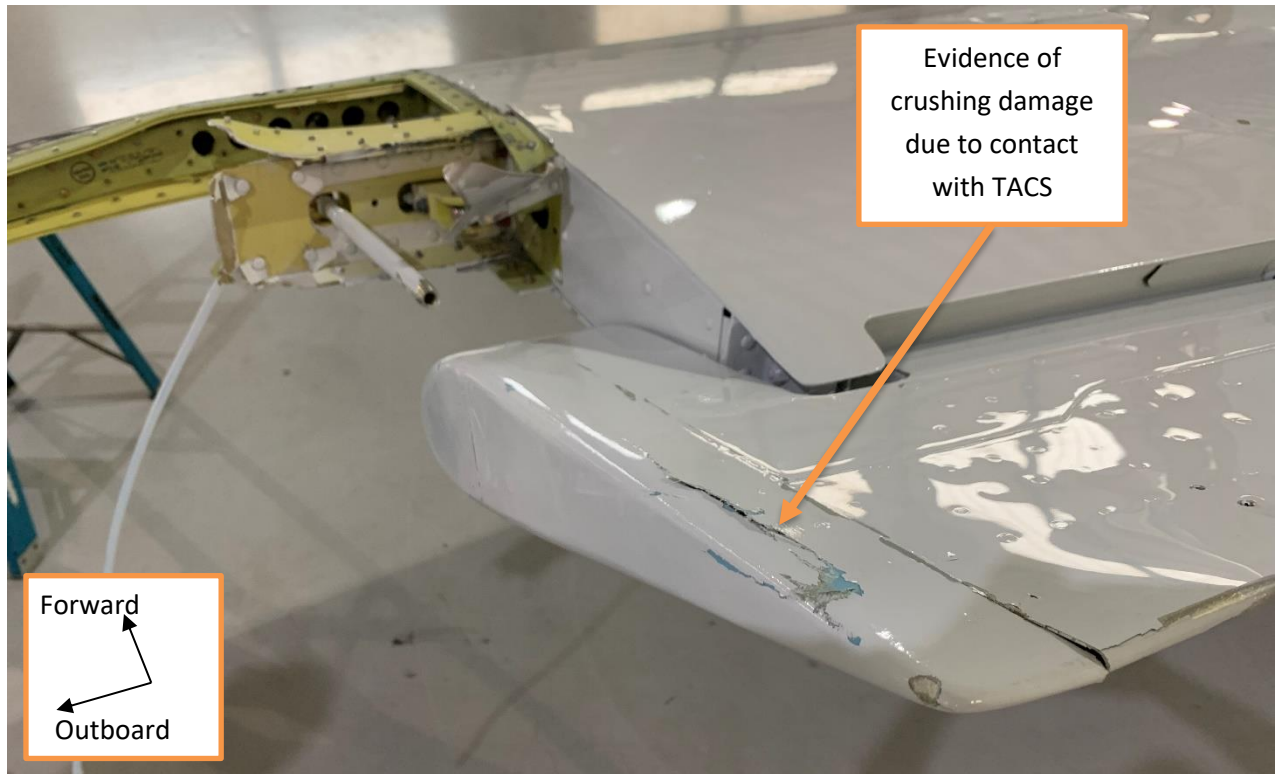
Aileron tip cap crushing damage (view looking forward and inboard)
